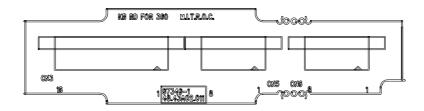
PCB No. 97349-1 Keyboard/Touchpad Board (Top View)
